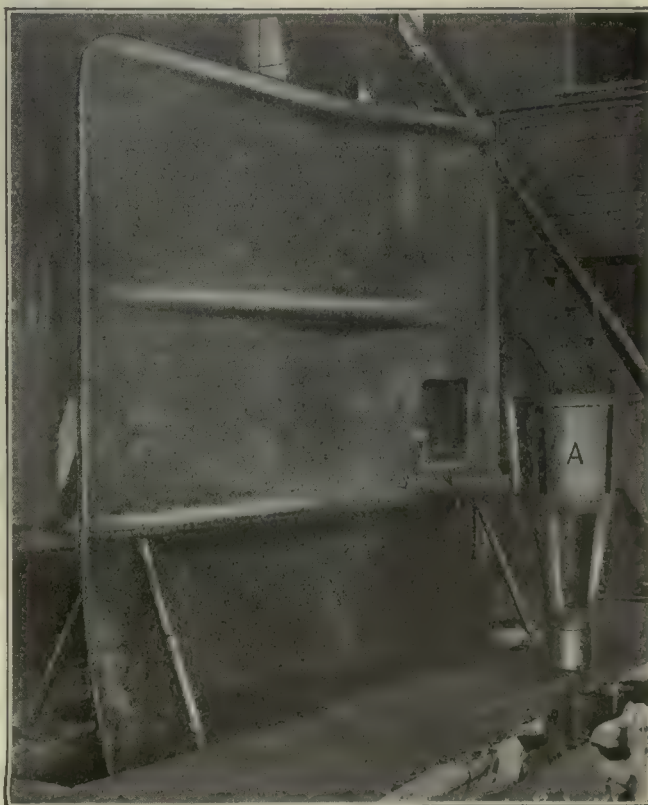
THE RUDDER ASSEMBLED FOR INSPECTION
